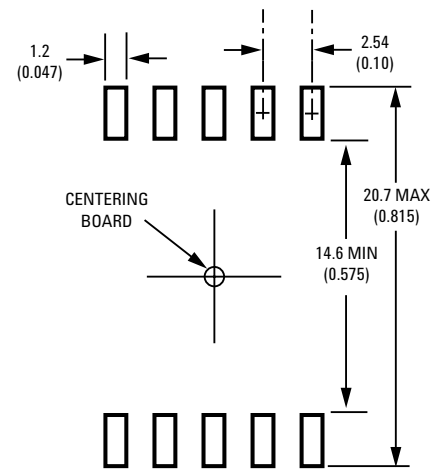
Recommended land pattern for the 0.56" SMT S4 package with a minimum 0.10 mm heel and toe fillet using a 0.10 mm placement tolerance.
